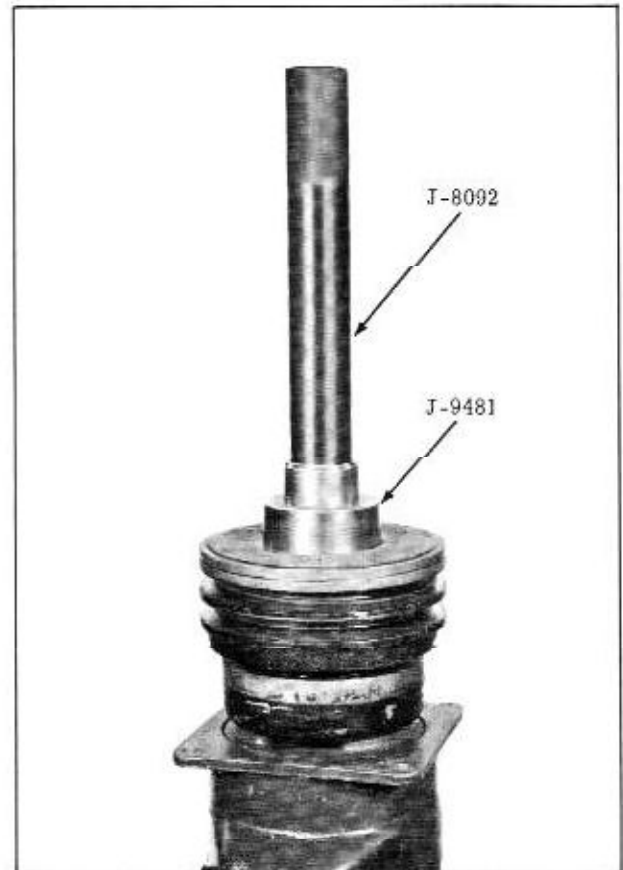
Installing Pulley and Drive Plate on Compressor
